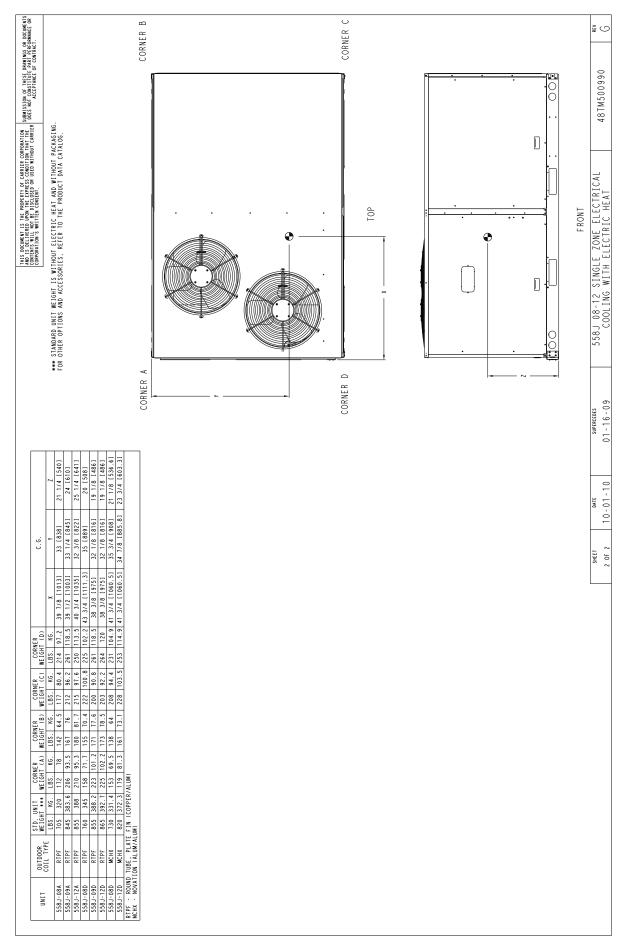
Unit Dimensional Drawing — Size 08, 09, 12 Units (cont)
